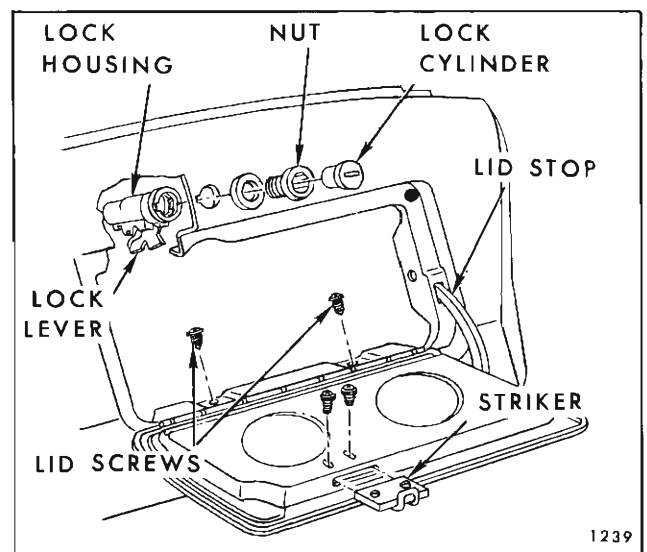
C17—Instrument Panel Compartment Door Assembly - 43-44000 Series
